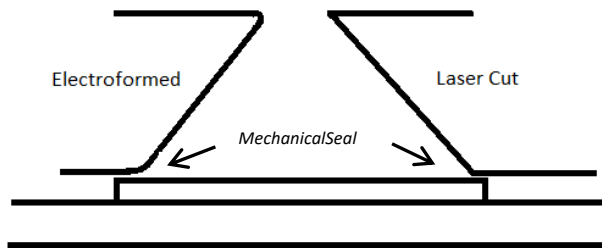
Mechanical Seal Illustration: Electroformed Stencil vs Laser Cut Stencil
